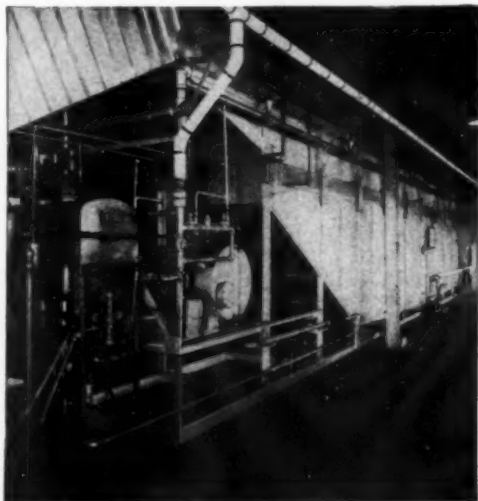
Solvent still that may be used for batch or continuous reclaiming of solvent, is shown here applied to a large automatic vapor design of degreaser equipped with double monorail conveyor of "through" type.
